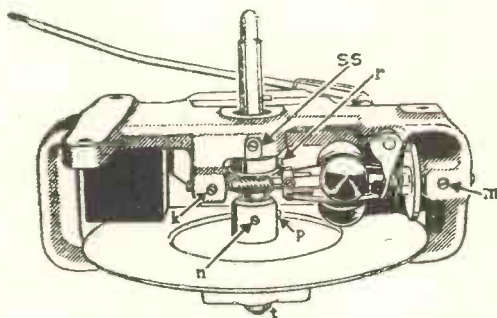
THE BEARING SCREWS OF THE H.M.V. TYPE 24 MOTOR.
